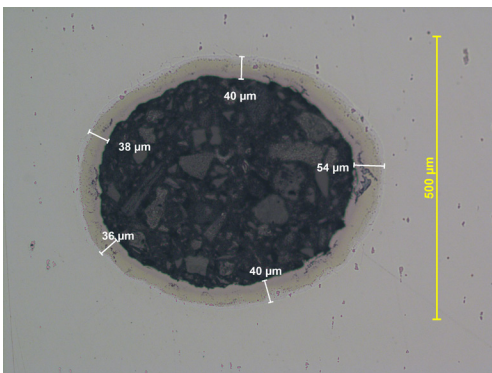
Section view of type "A" hole drilled with 0.3 mm electrode
